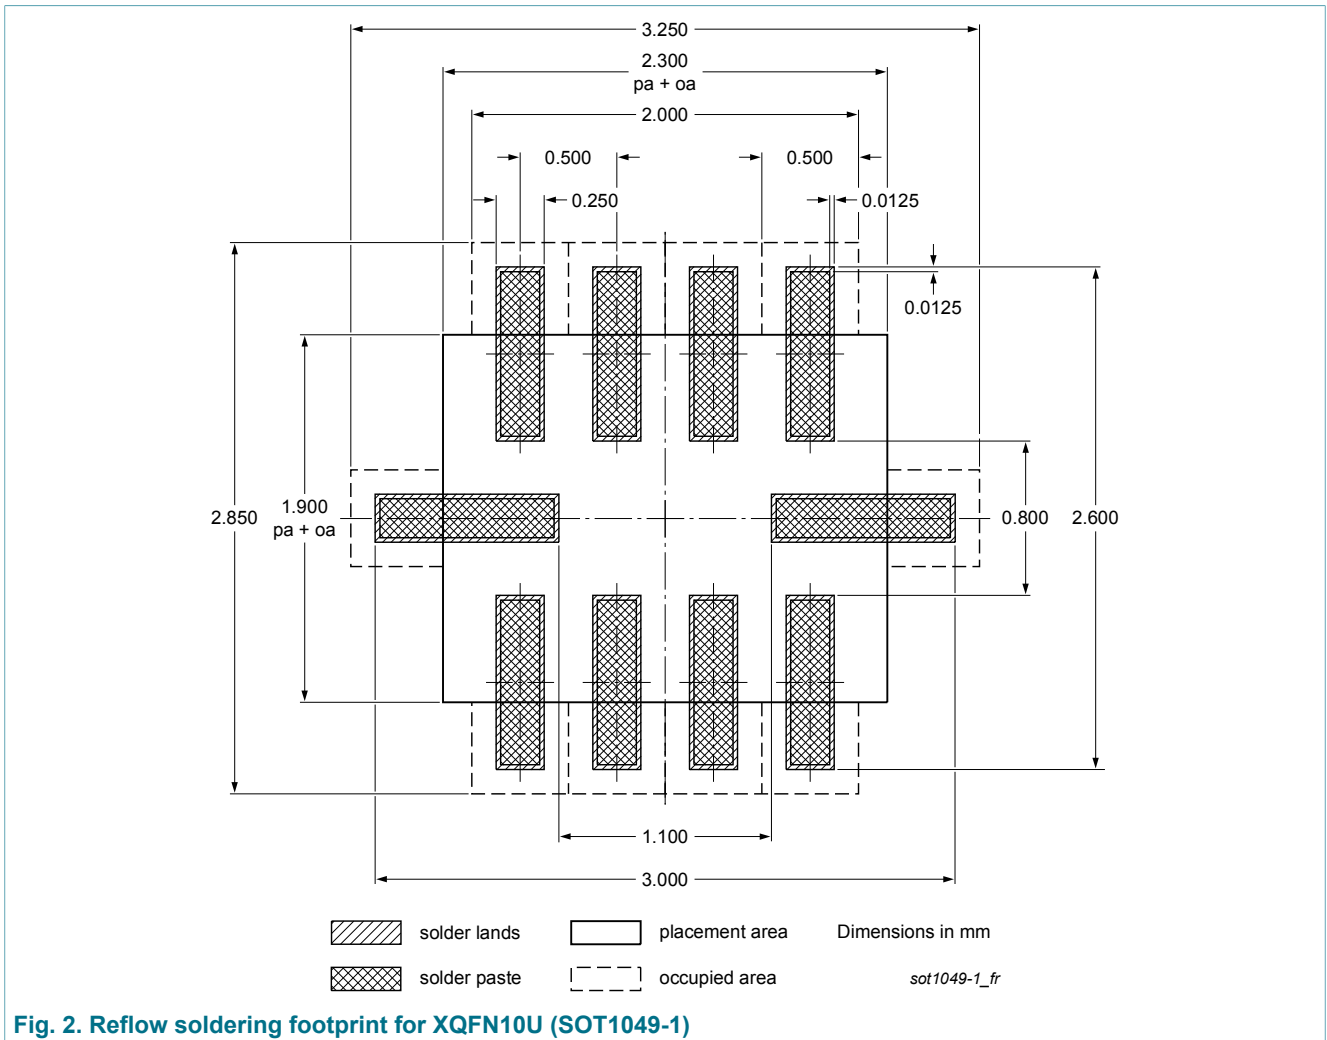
Reflow soldering footprint for XQFN10U (SOT1049-1)
